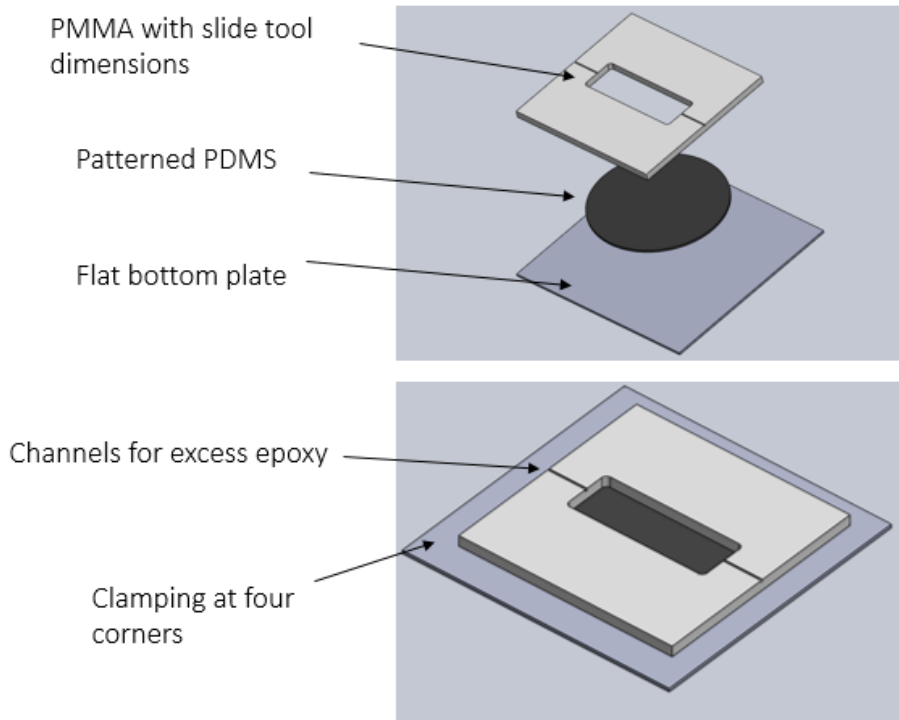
Exploded view of the components used in the epoxy casting rig.
